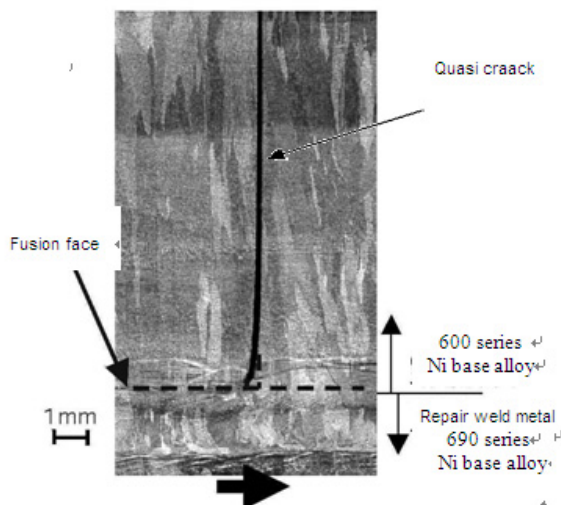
Macro structure of repair weld of the test specimen with quasi-crack
